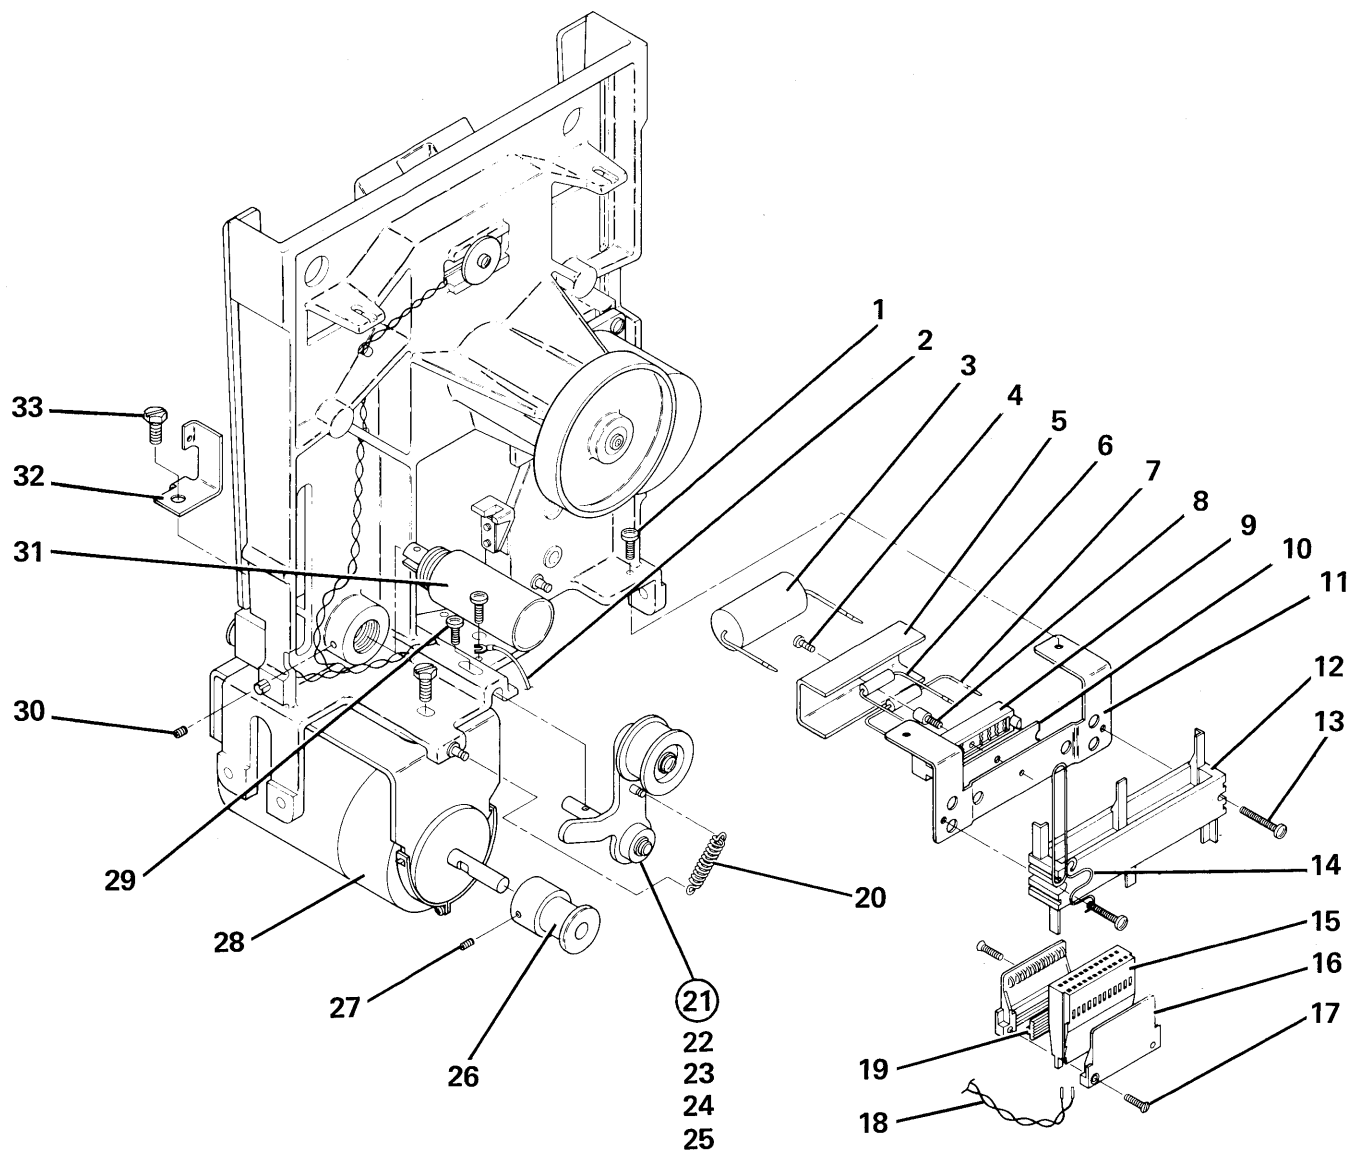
BASE PLATE ASSEMBLY. SEE LIST 18.
